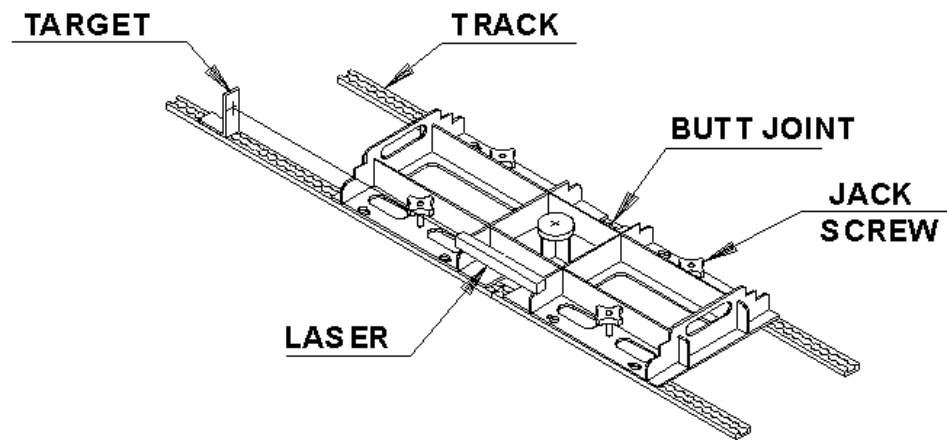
Installation Jig showing Laser & Target Setup for Track Alignment
